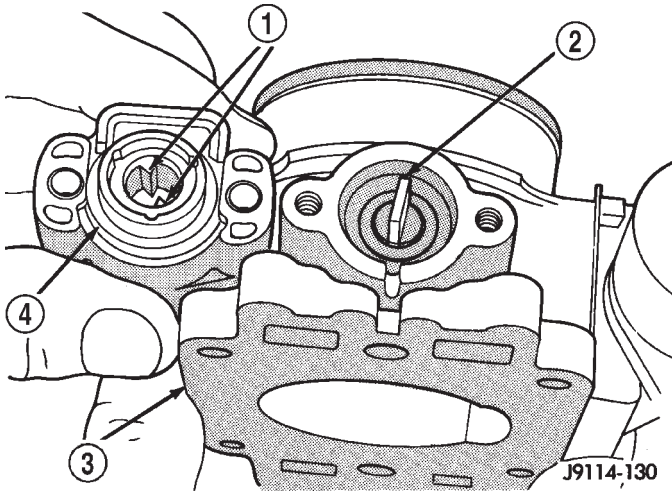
Throttle Position Sensor Installation—2.5L Engine
